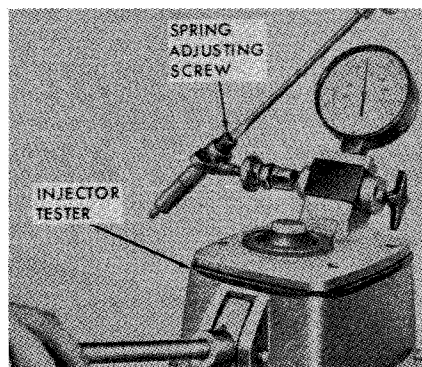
Adjusting nozzle opening pressure; refer to paragraph 118 for specifications.
